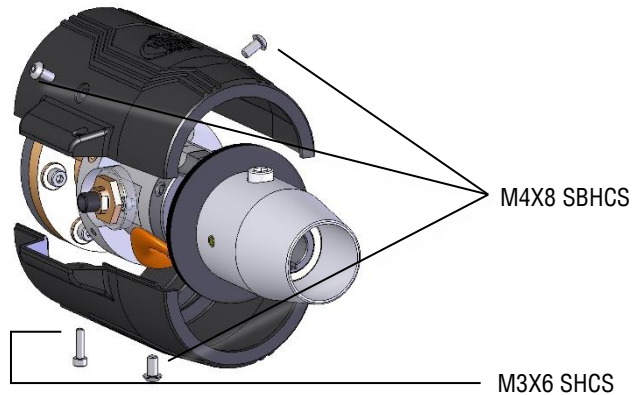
The most recent 5800 features the black outer cover that splits into two pieces, using a total of (4) fasteners to hold it together.
